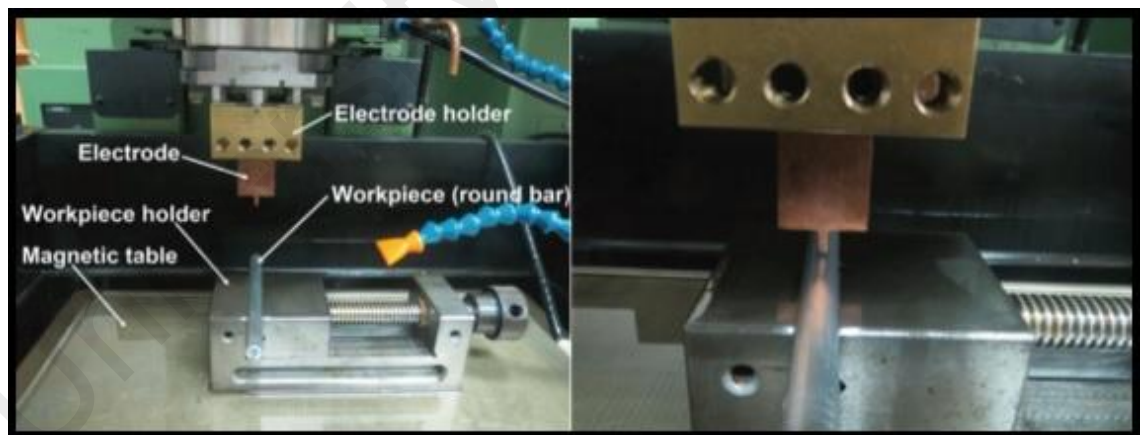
The setting-up for preparing an initial surface crack in a specimen using the die-sinking EDM machine.
